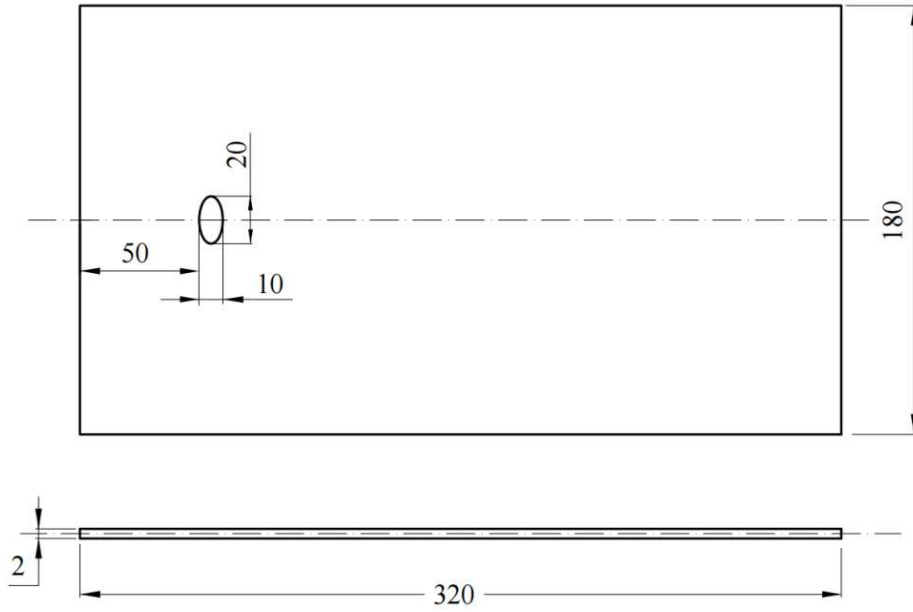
Dimensions of test specimens for 2024-T3 and 7075-T6.
